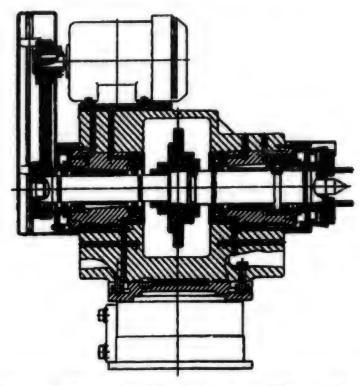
Longitudinal Cross Section of Positive/Reverse Rotating Prismetic Diamond Rotary Dresser for Grinding Ball Thread G: Joves and Standard Shape Gears
